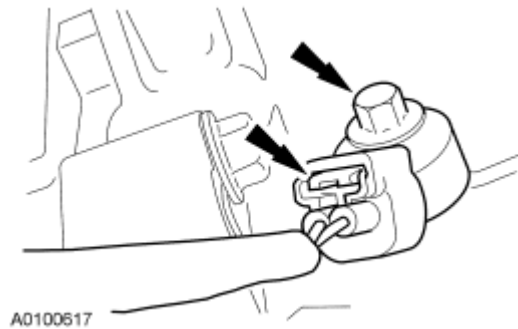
Locating Knock Sensor (KS) Electrical Connector & Bolt
